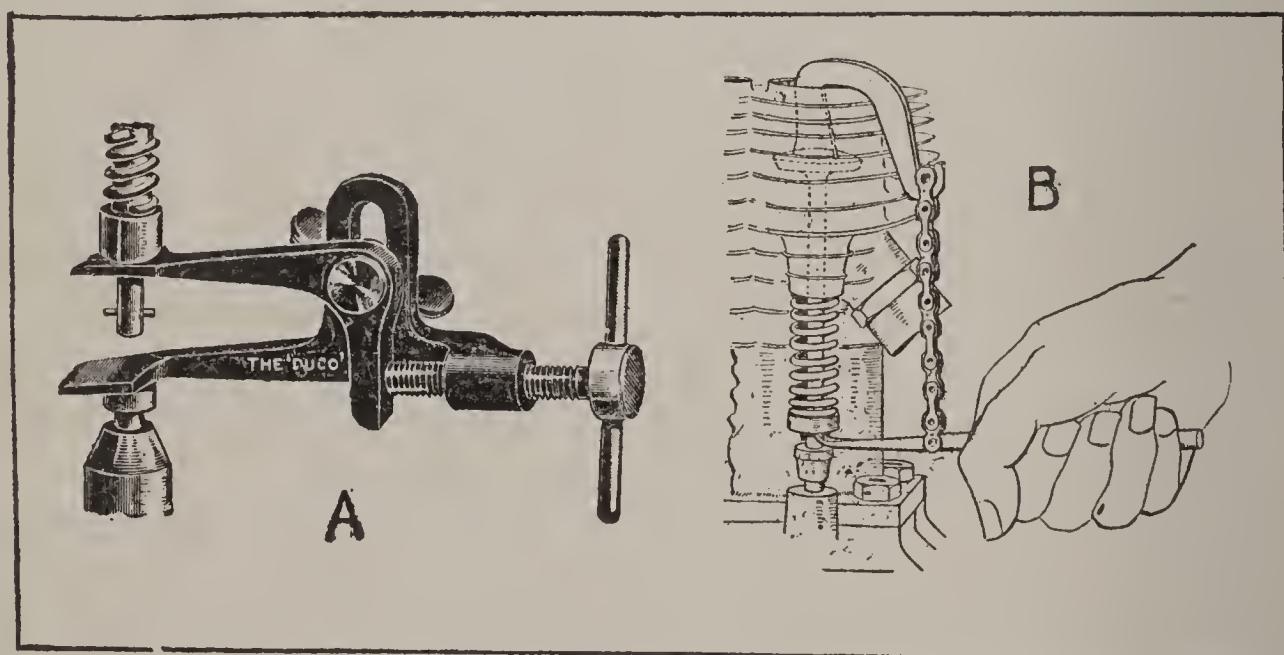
Two Methods of Raising Exhaust Valve Spring to Permit Valve Removal.
